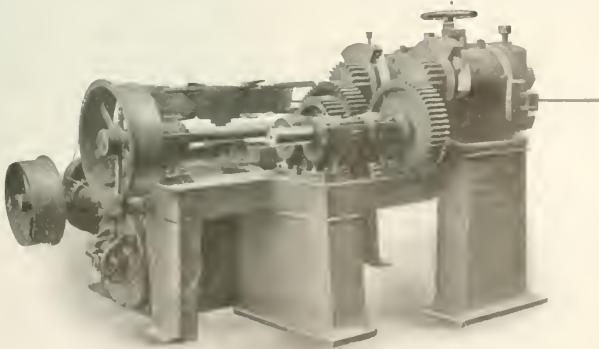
Opposite Side of Kane & Roach Machine shown in Fig. 1
